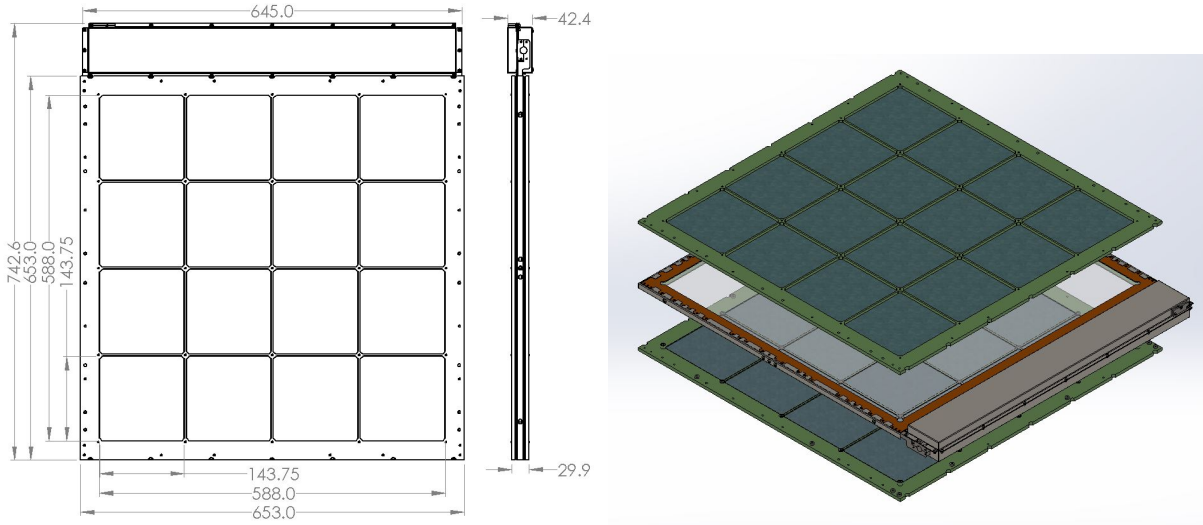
(Left) Dimensioned drawing of a FD2-VD PDS detector module. (Right) Exploded view showing major design elements. The double-sided module concept to be used in the cathode is shown (with dichroic filter windows on both sides of the module). For the membrane mount modules, the windows on the side facing the cryostat wall are replaced with a reflector-coated G-10 sheet. [A photograph of a module that will be tested in the cold box at CERN is shown in Figure 1.1.]
